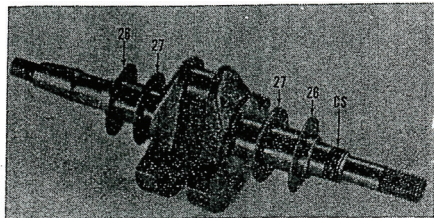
Be sure the steel thrust washers (26) are to outside of thrust bearings (27) when installing crankshaft on models XL-12, Super XL-12 and XL-15. Other models do not use thrust washers or thrust bearings.
